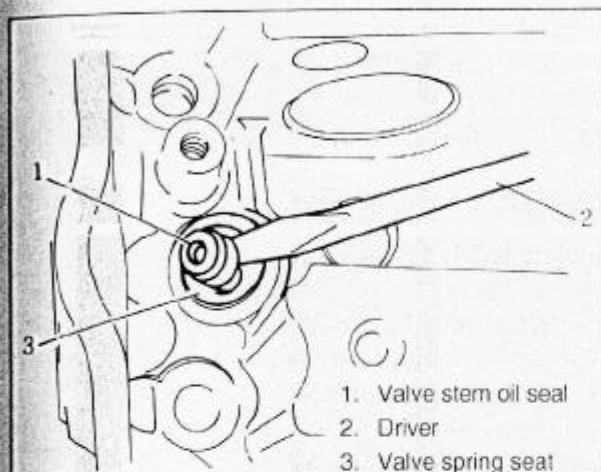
A — 46 REMOVAL OF VALVE STEM OIL SEAL
